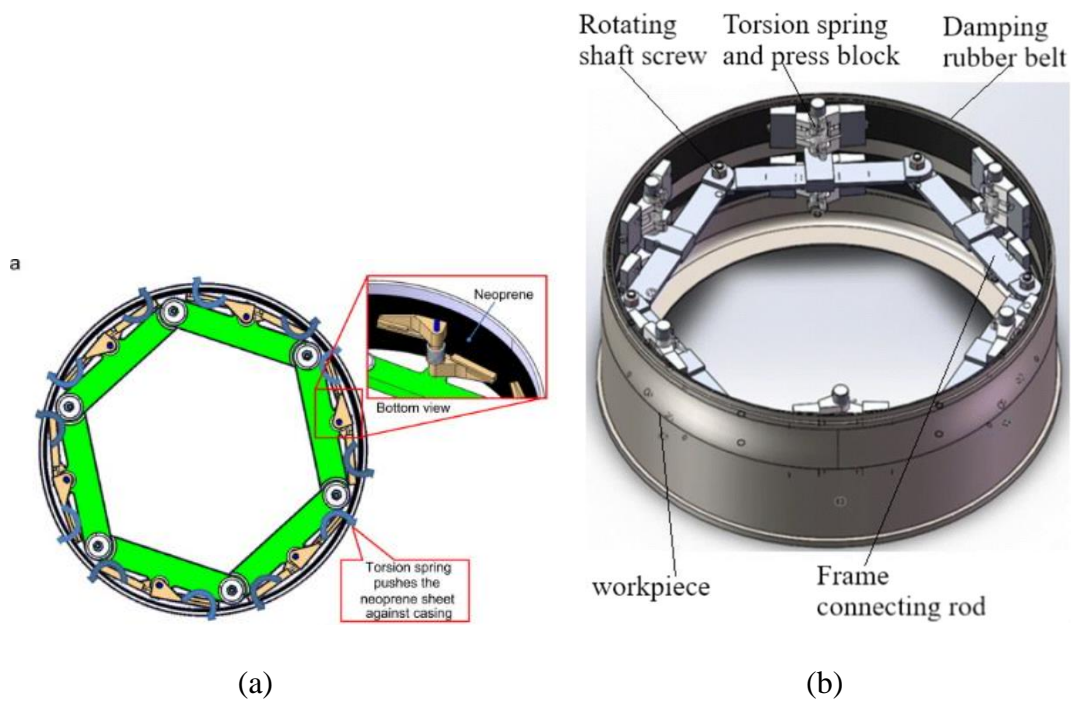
Novel fixture designs for machining of flexible workpiece [199, 200].
